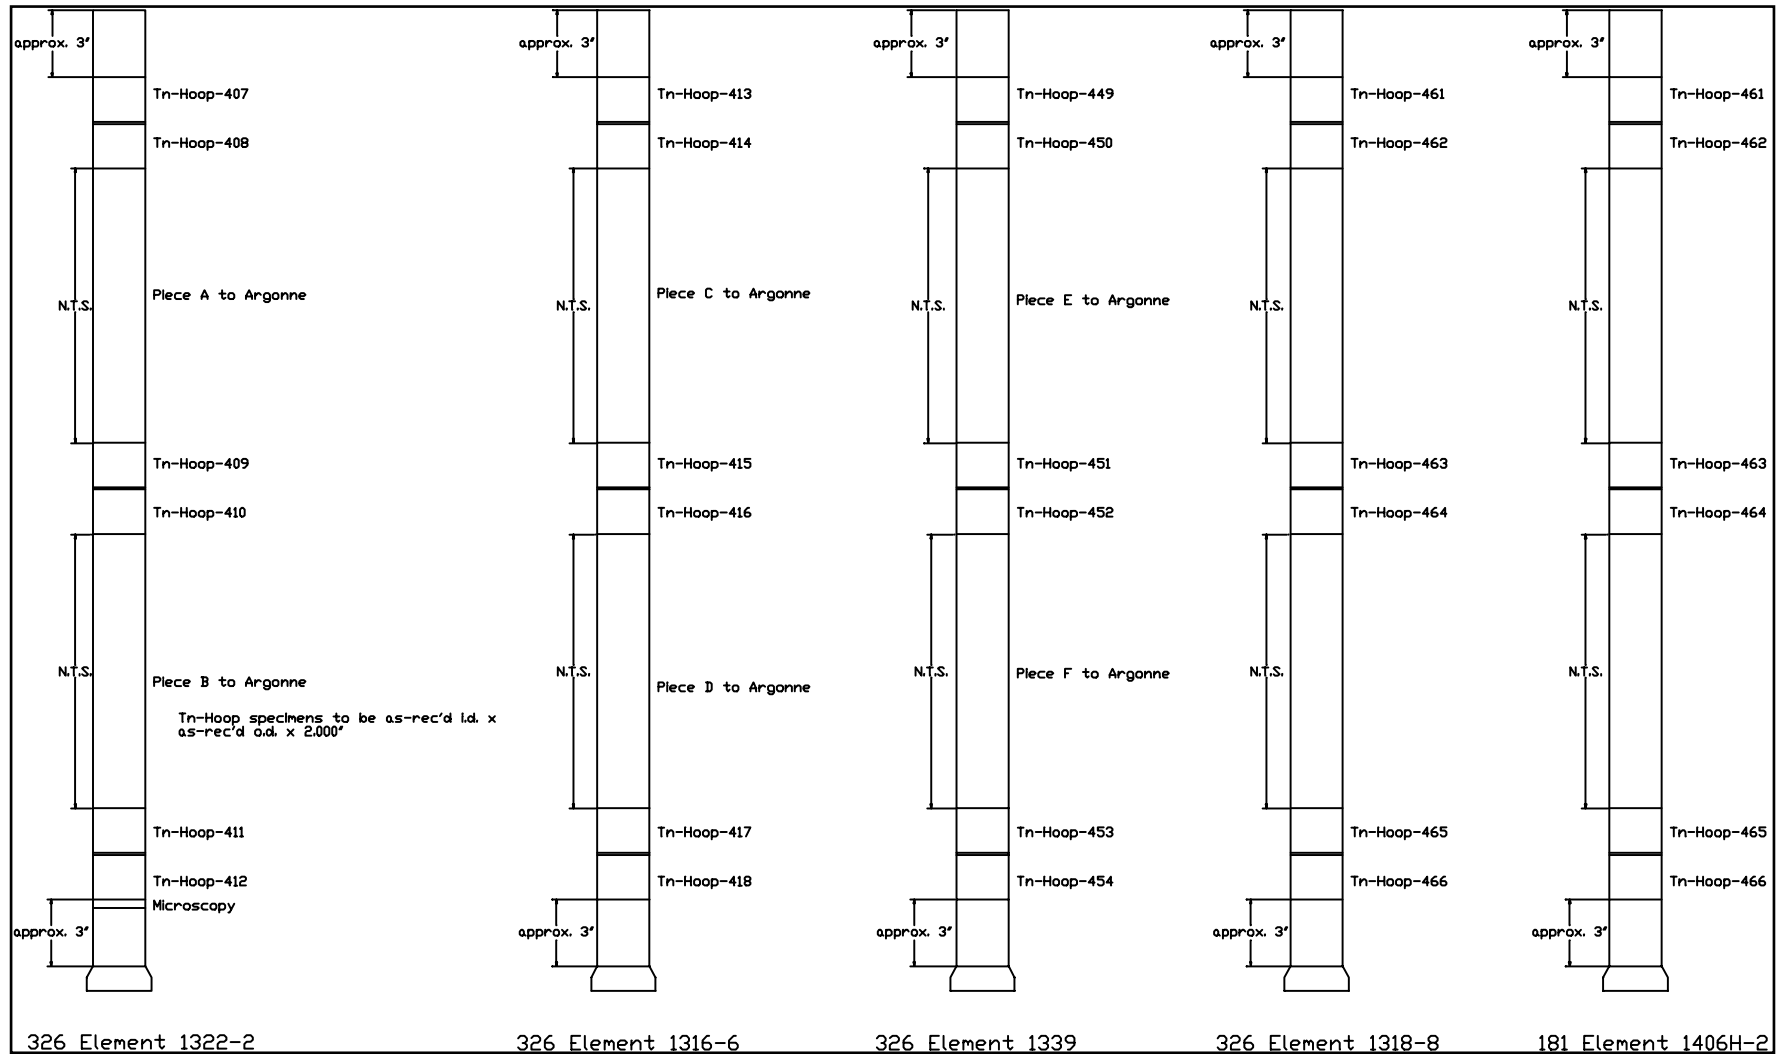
Cutting Plan for Pall 326 and 181 Clay-Bonded SiC Filter Elements
